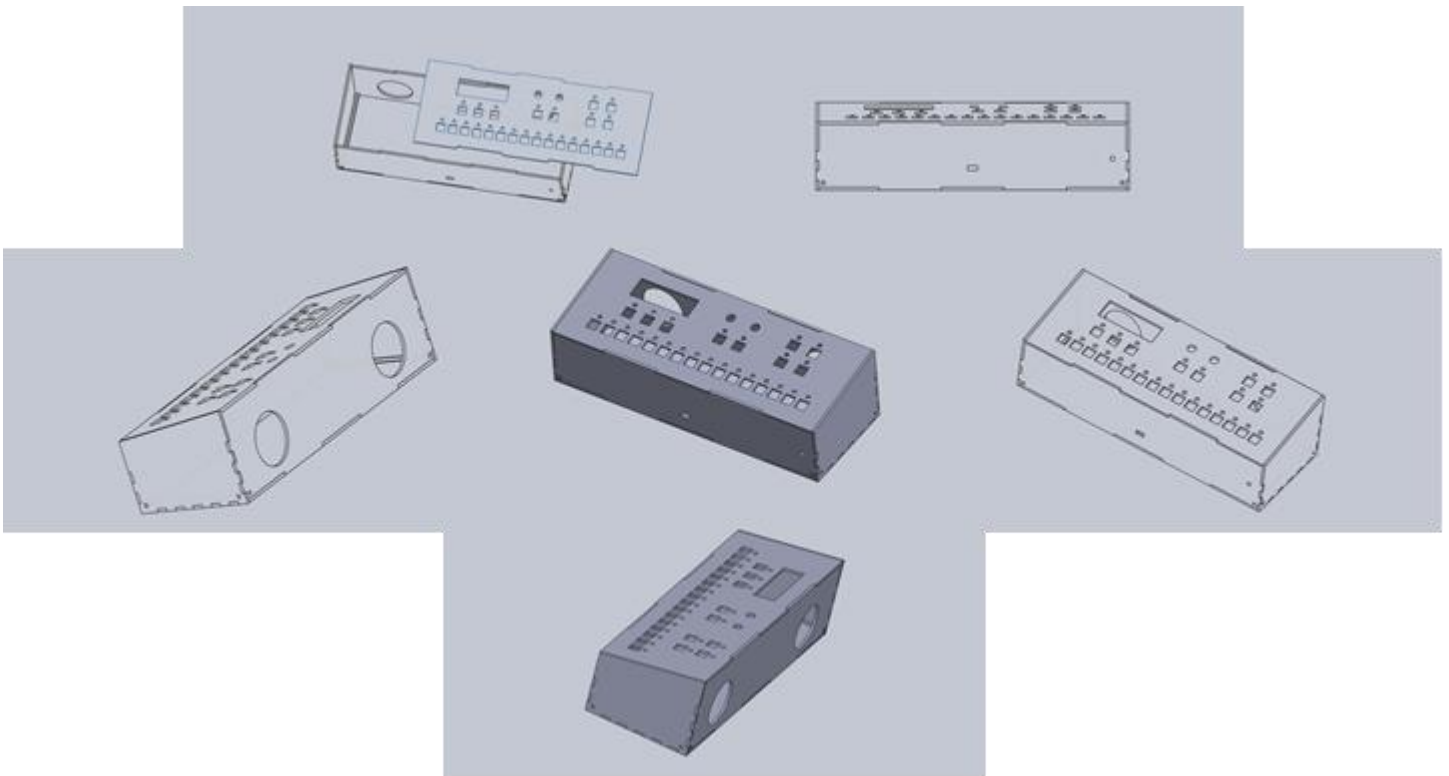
MULTIPLE DESIGN VIEWS OF ASSEMBLED DRUM MACHINE HOUSING
